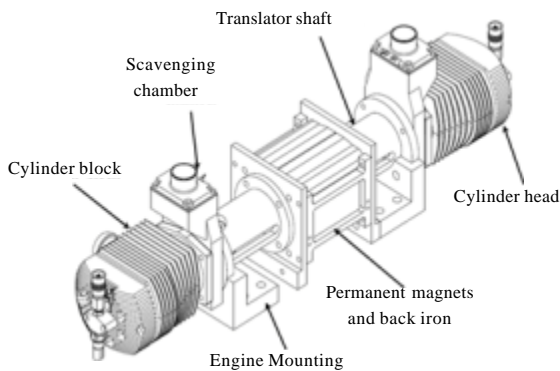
UTP two-stroke, free-piston linear generator engine prototype
